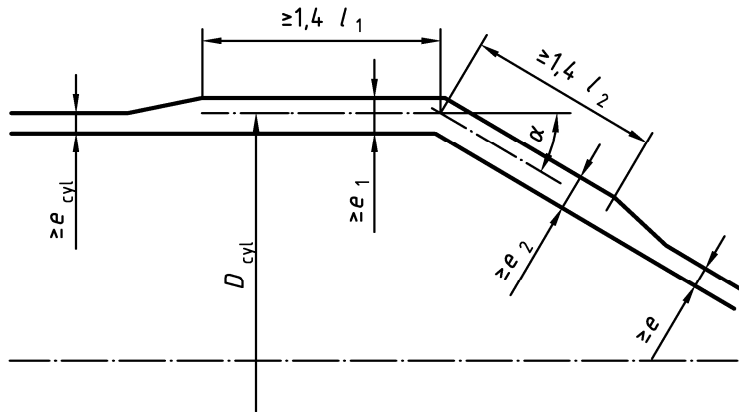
Geometry of cone/cylinder intersection without knuckle – Large end
